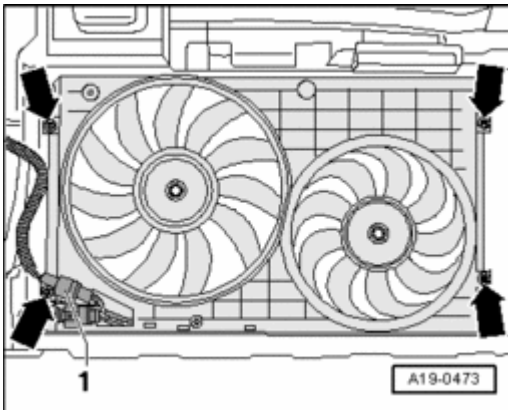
Identifying Harness Connector And Fan Mount Mounting Bolts
